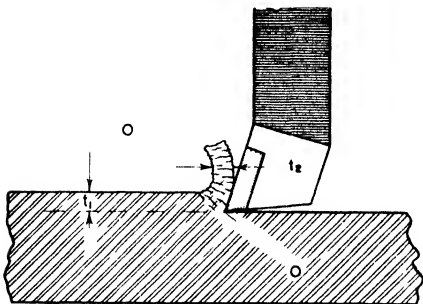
Illustrating the Shearing Action of a Shaping Tool
